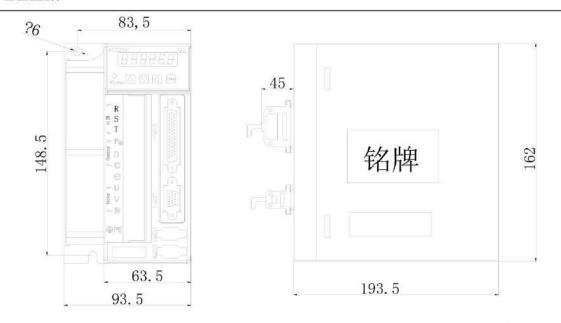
Side figure of DZ-20B2, DZ-30B2 series installation dimension
